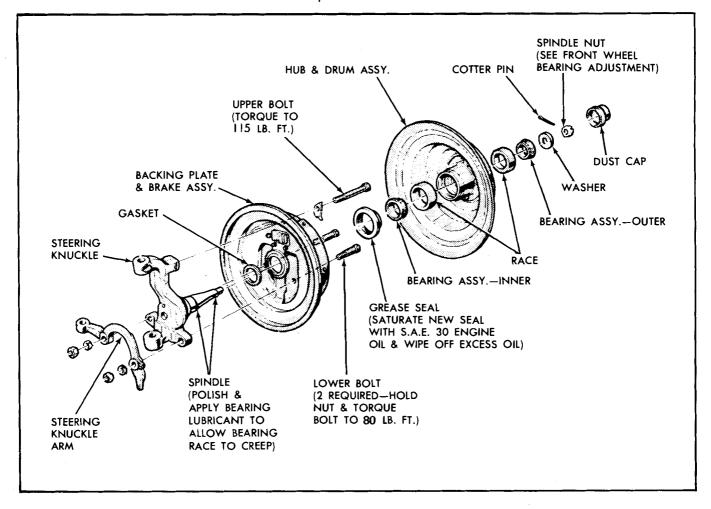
Installation of Steering Knuckle, Hub and Drum Assembly (A & X Series)
